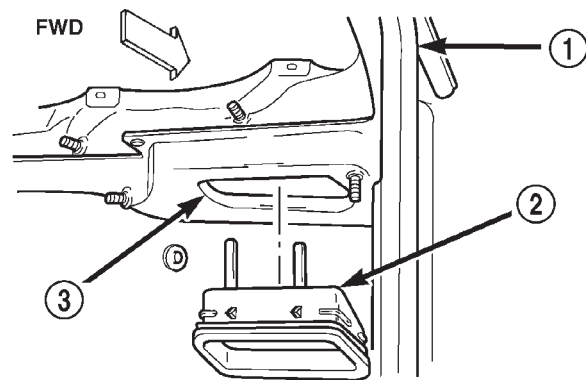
HVAC HOUSING INLET BAFFLE REMOVE/INSTALL
